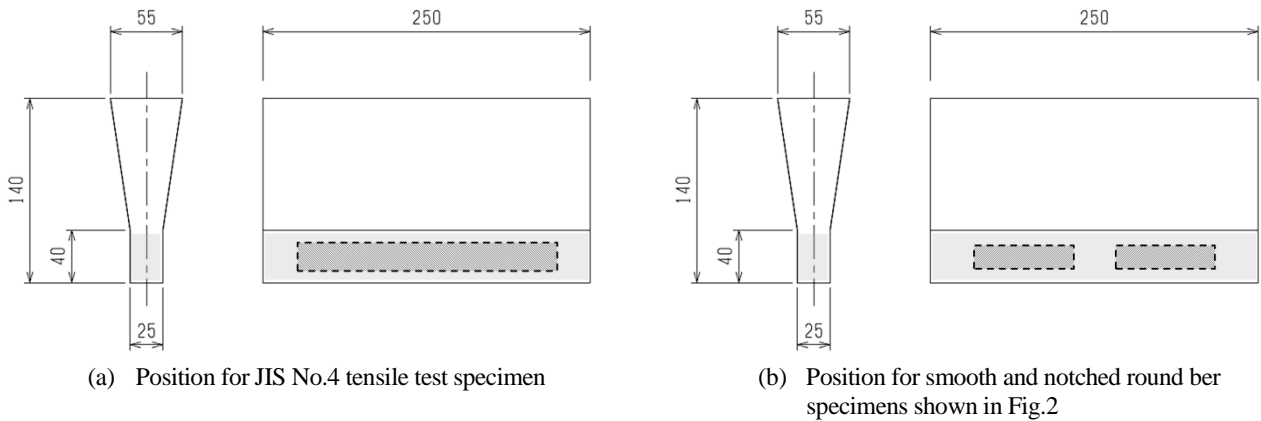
Schematic view of Y-shaped block (in mm) and position of specimens.
